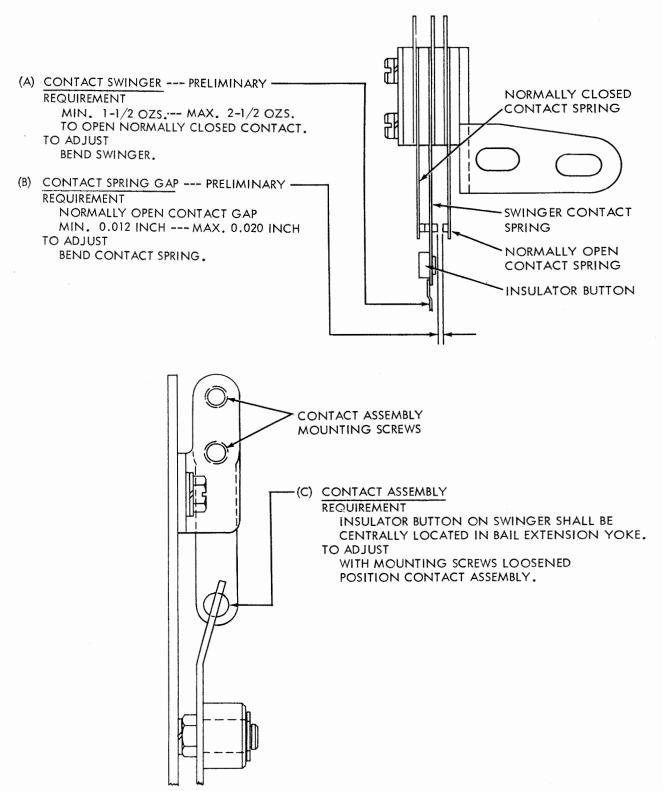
M. TYPING REPERFORATOR TT-375/UG, END OF FEED-OUT TIMING CONTACT FOR NON-INTERFERING LETTERS AND BLANK FEED-OUT MECHANISMS
